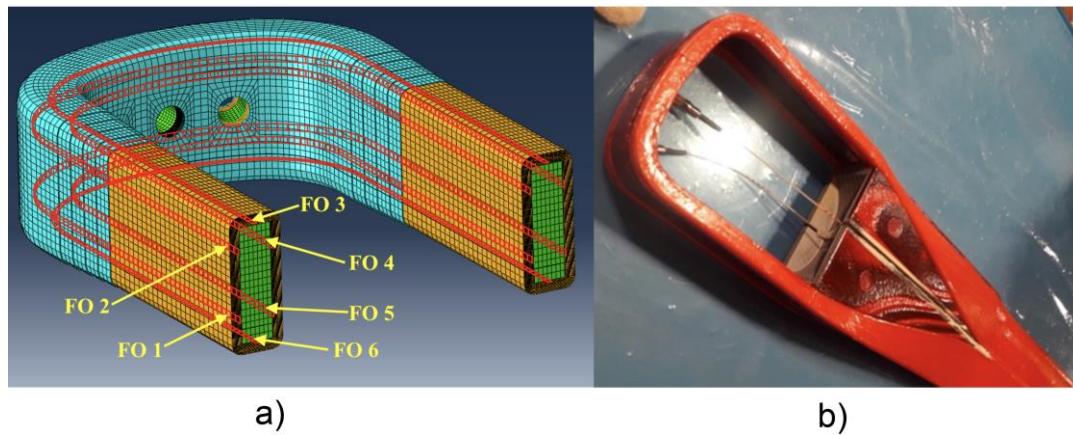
a) virtual optical fibre paths; b) example of optical fibres integrated in a helicopter tail rotor blade, adapted from [42] with permission.
